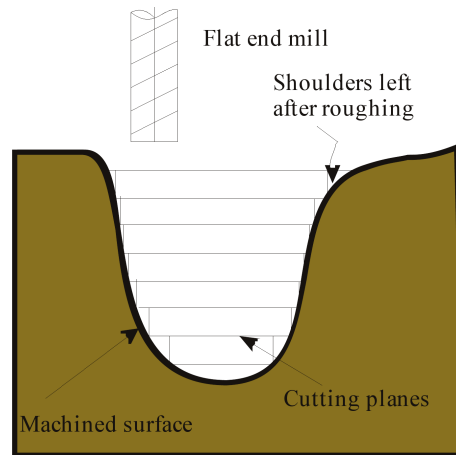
Pocket machining with flat-end mill in roughing and semi-roughing with ball-end mill.
